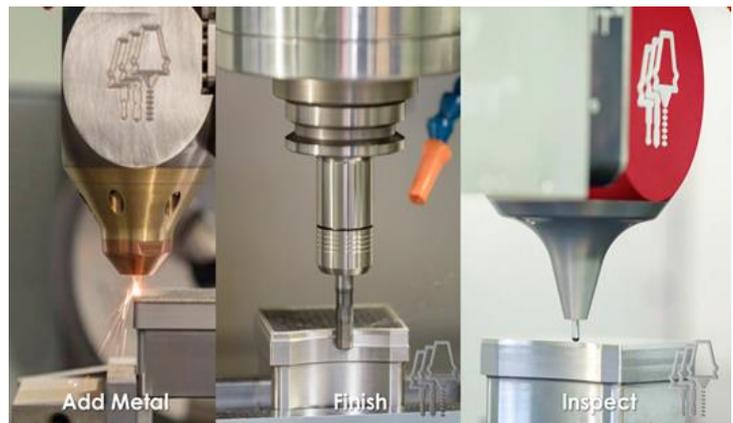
Hybrid machines co-locate digitally driven tools for adding, finishing, and inspecting metal parts
